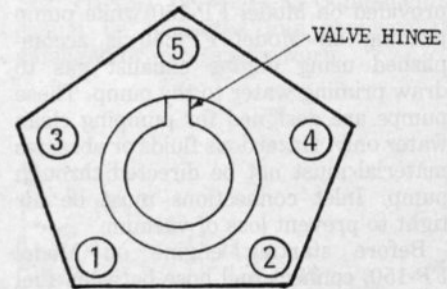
Tightening enquence for outlet retaining screws.
